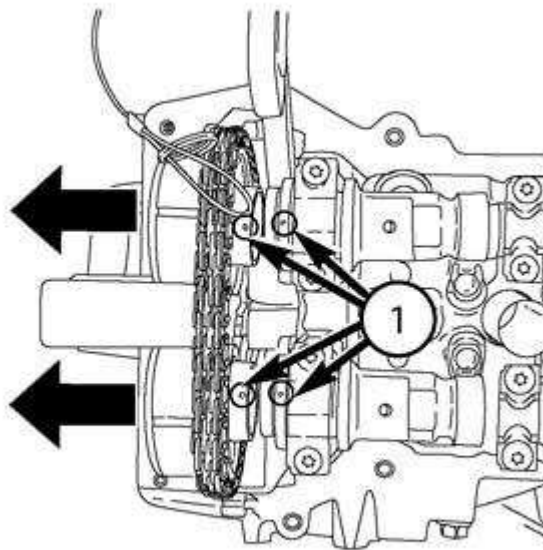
Phaser Timing Marks, Oil Control Valves & LH Camshaft Phaser Lock
